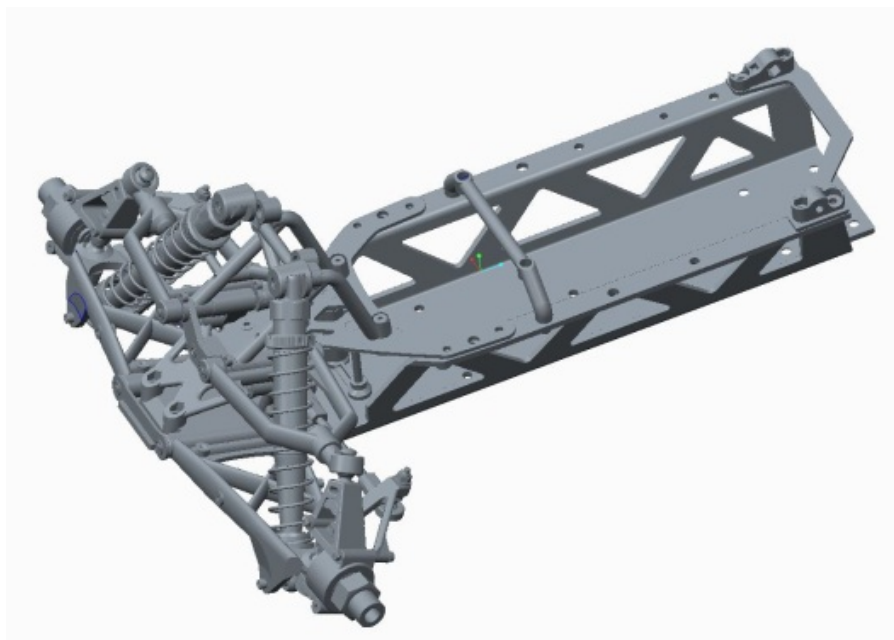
Component Assembly provided as part of iFAB-META Exercise
